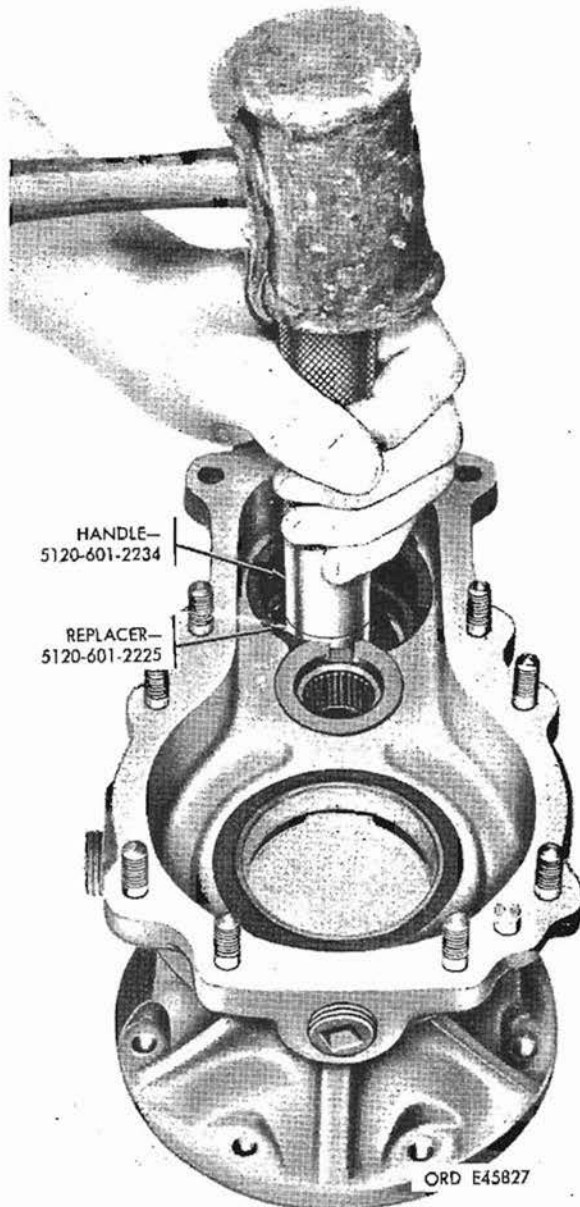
Installing plain enclosed seal in drop gear axle housing using replacer - 5120-601-2225 and handle - 5120-601-2234.
